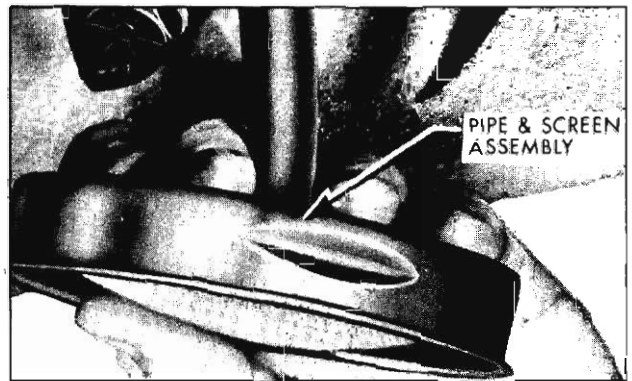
A Oil Pump Pipe and Screen Assembly
